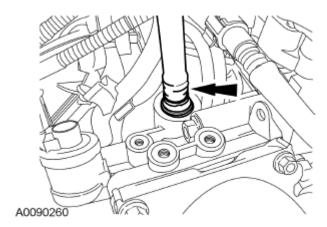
Locating Heater Core Hoses Courtesy of FORD MOTOR CO.
